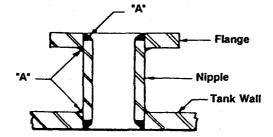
Flanged nipple outlets in tanks and covers. Welds "A" should be burned into plate so welds meet from opposite sides, thereby excluding air pocket. Welds must be peened and ground smooth.
